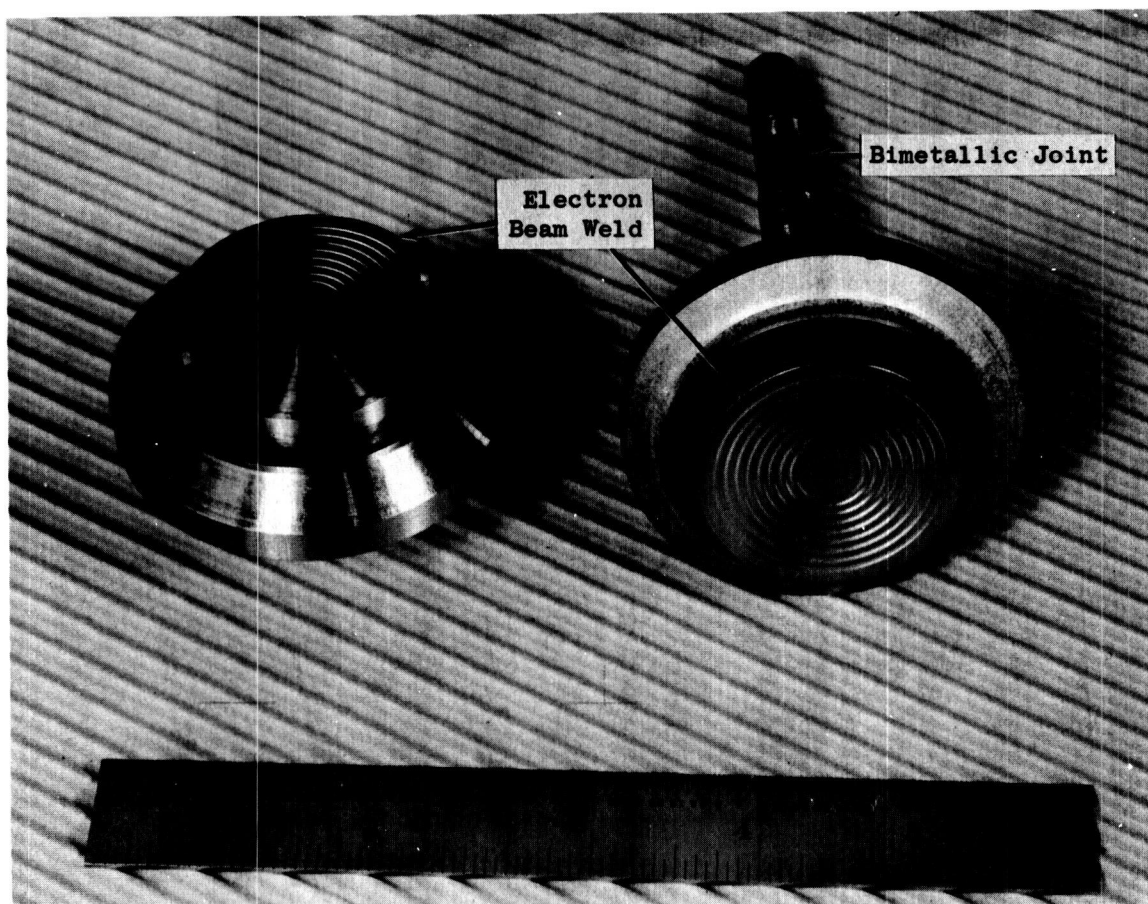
Taylor Cb-1Zr Pressure Transducer Upper Flange Assembly.
